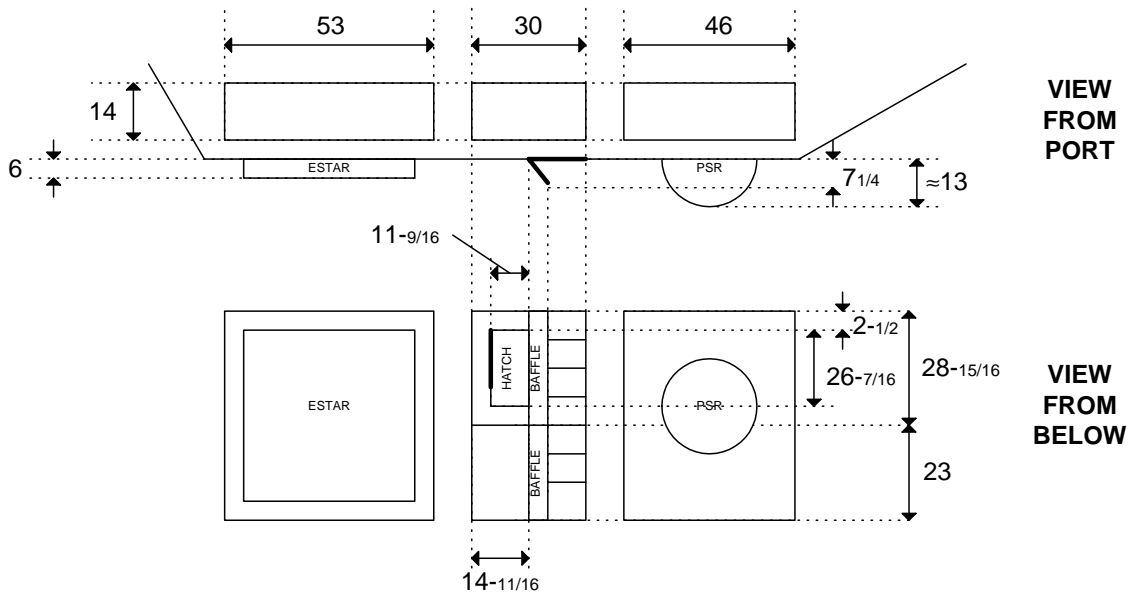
Dimensions of the bomb bay. All dimensions are in inches. This drawing is approximately, but not exactly, to scale.
